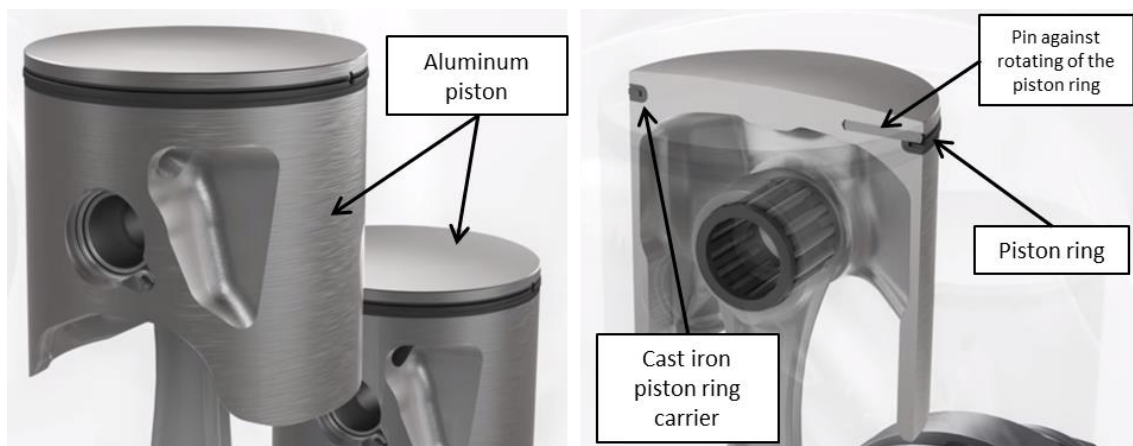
Aluminum piston with cast iron piston ring carrier of the BRP Rotax 850 E-TEC engine; adapted from [176]
